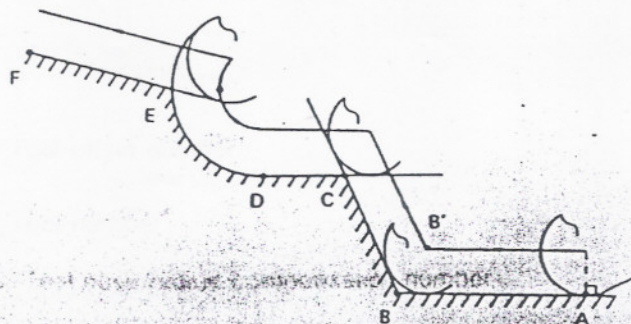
Tool Path with Tool Nose Radius Compensation
